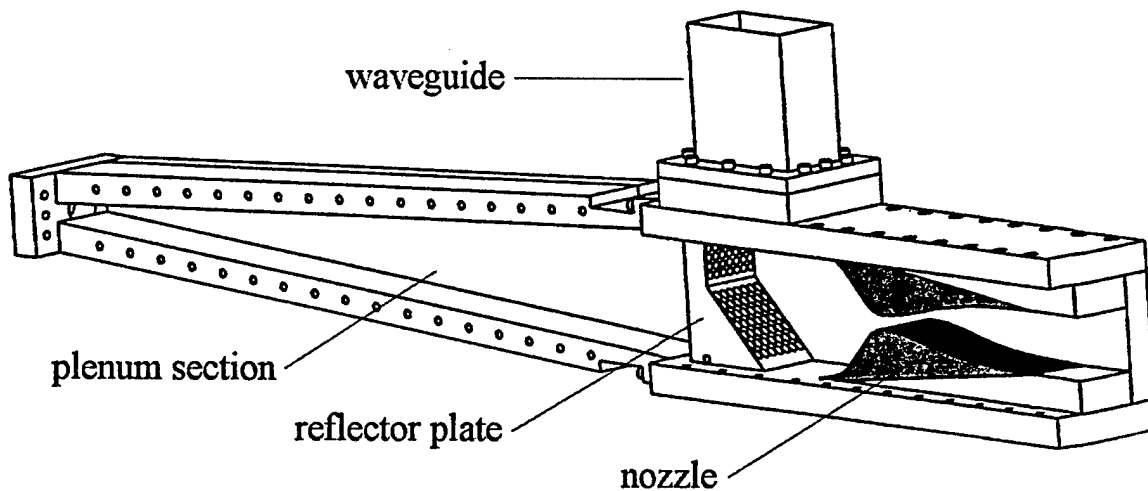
PLENUM AND NOZZLE CUTAWAY DRAWING
